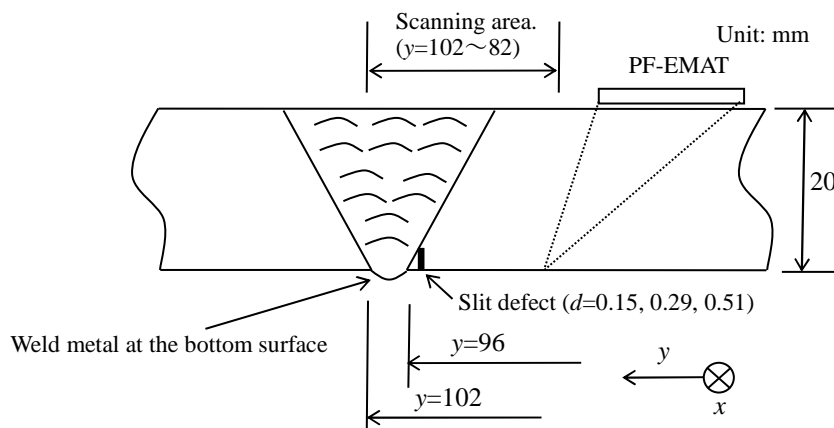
Schematic of specimen. There are slit defects near the welded area.
